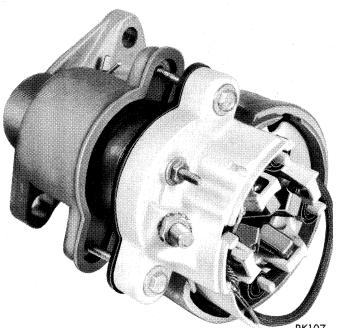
Removing Solenoid and Brush Plate Attaching Nuts
